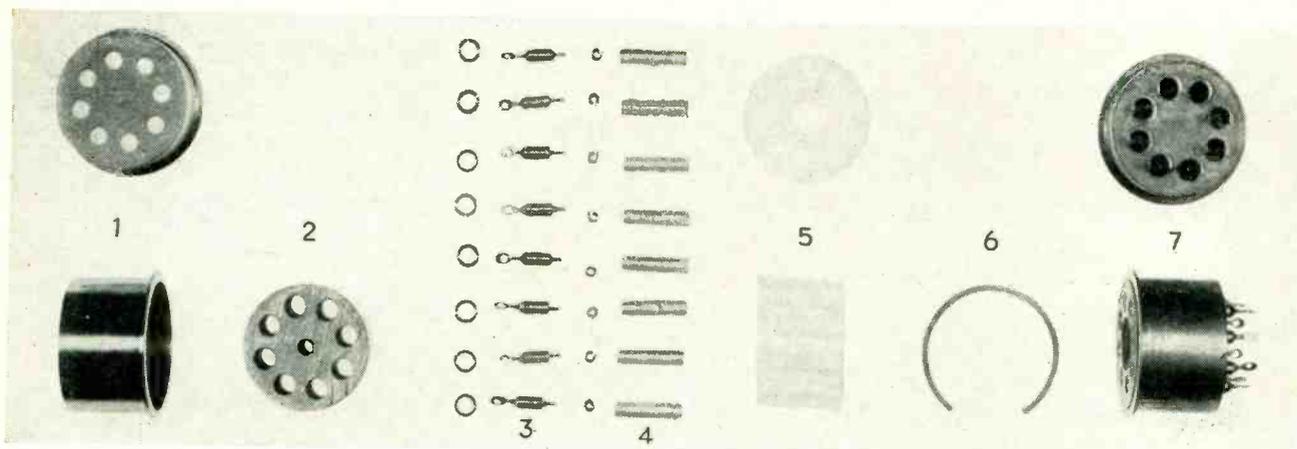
Component parts (1, 3, 4, 5, 6, 7) and metal assembly jig (2) of a hermetically sealed octal socket
